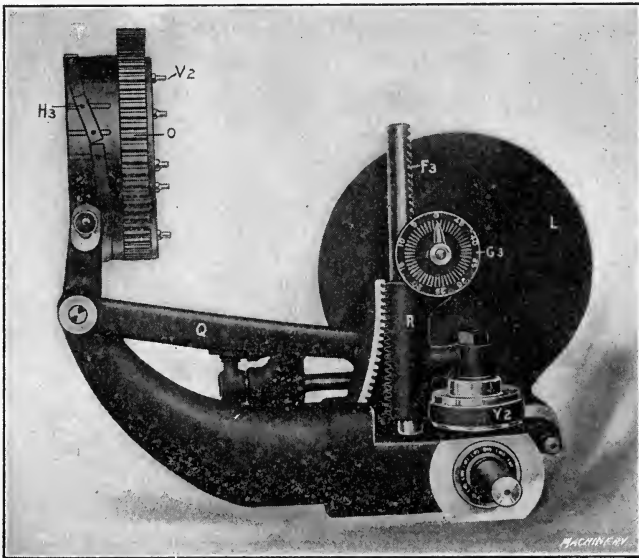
Detailed View of Automatic Feed-regulating Mechanism
